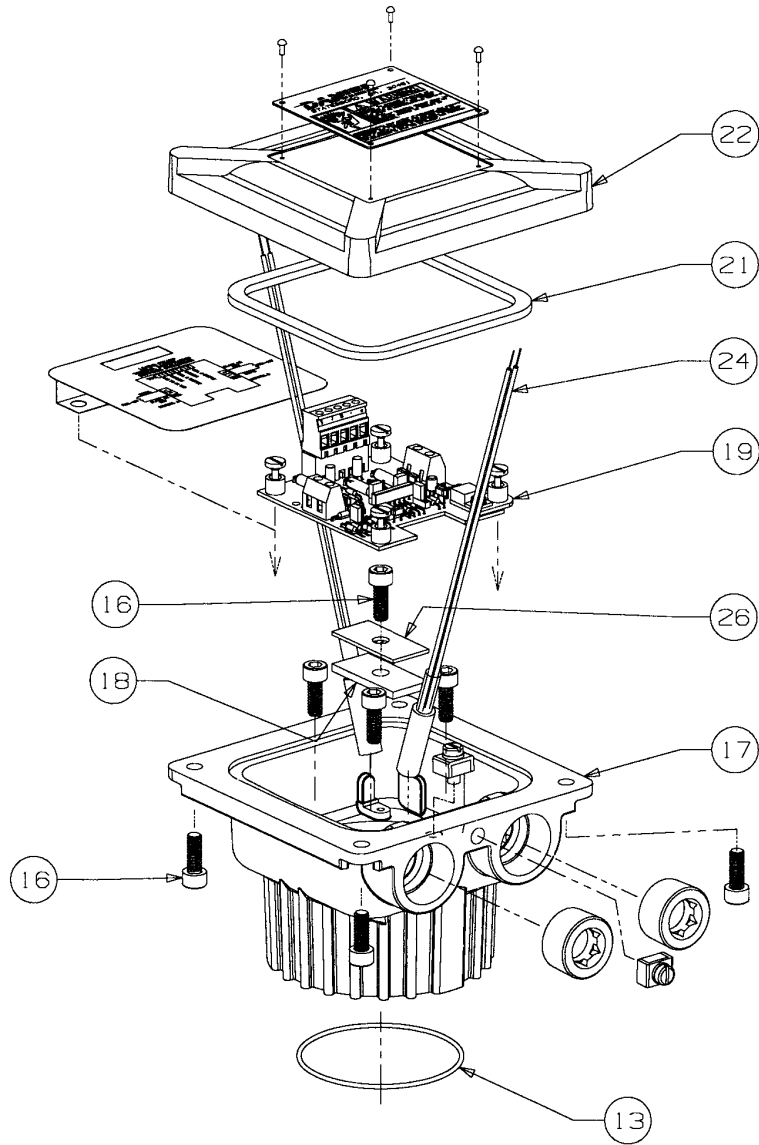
UMB Assembly (All Sizes) (Reference Table 7-1)
